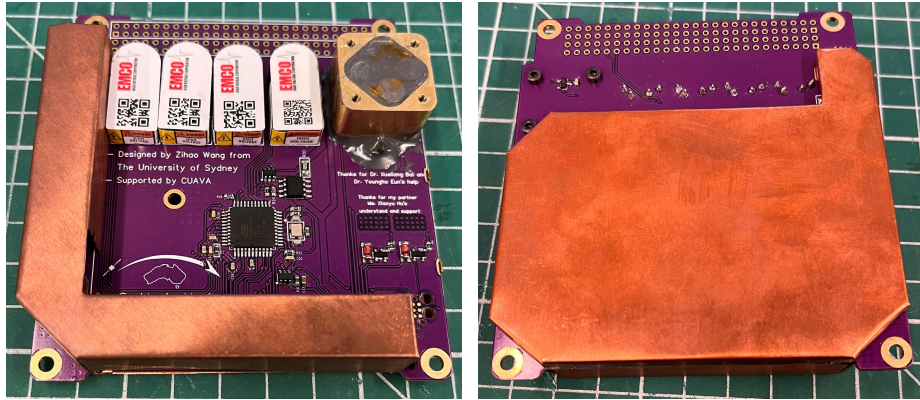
Assembly of the EPM payload board with copper shielding.
